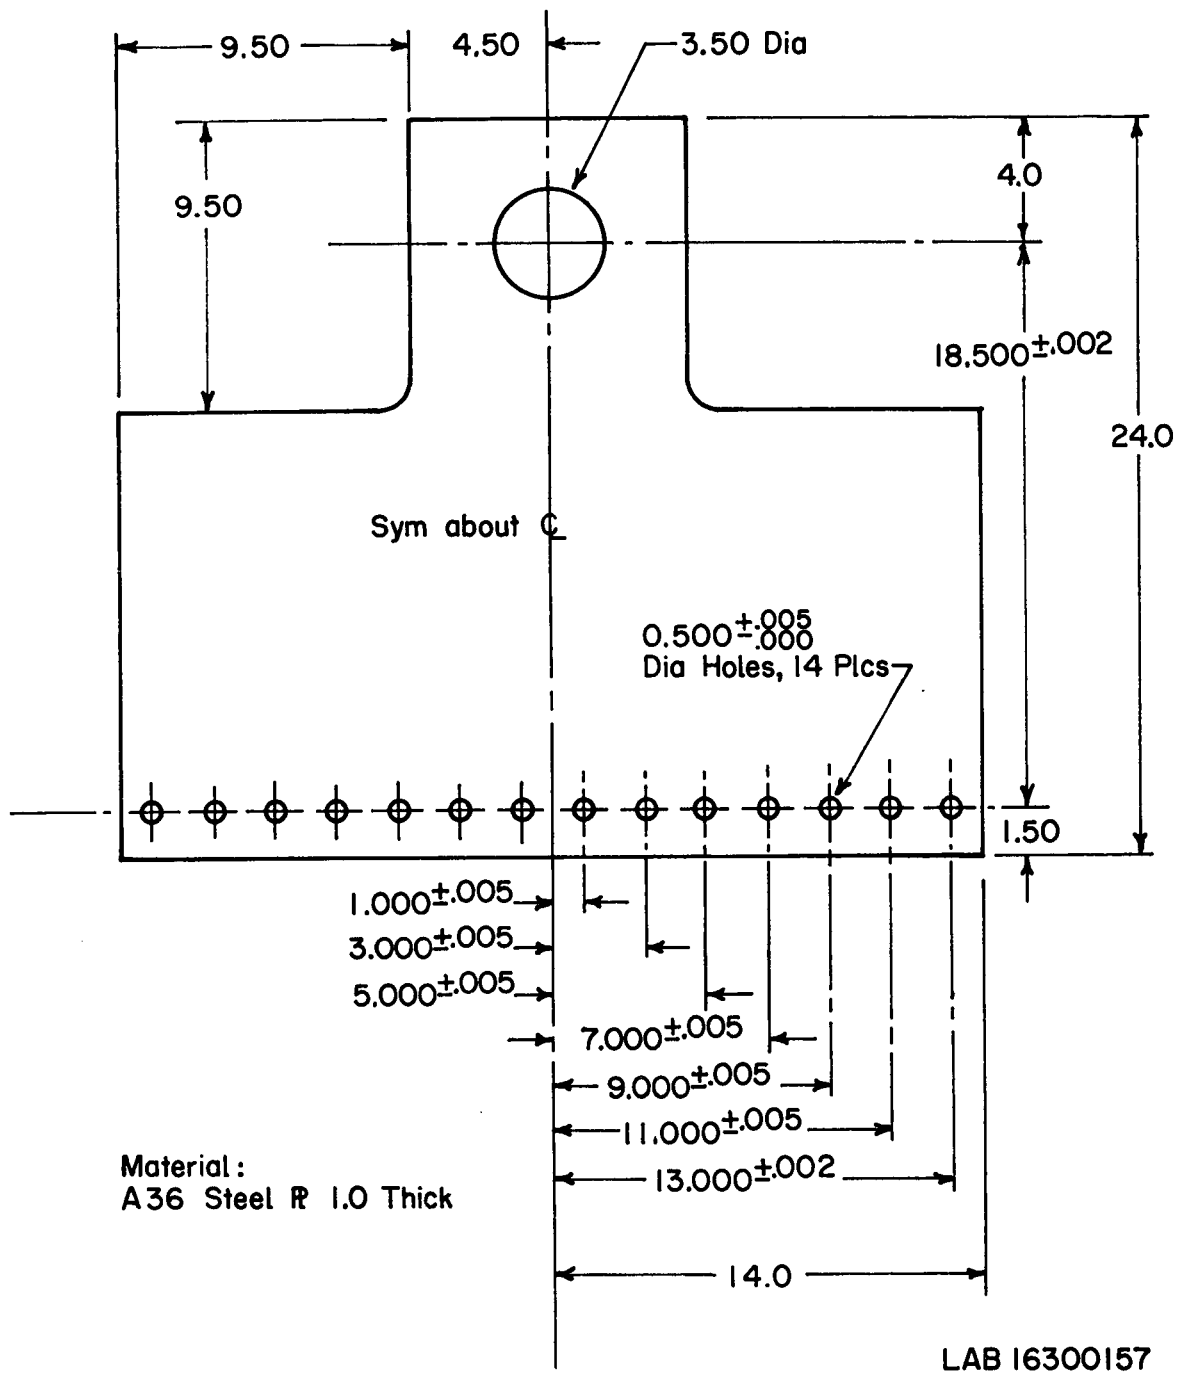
Loading Plate for Biaxial Fatigue Machine
